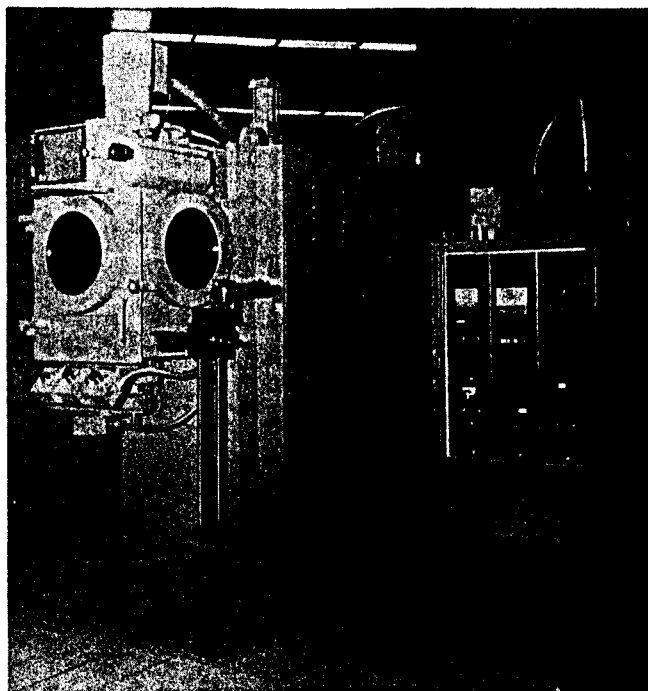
A General Purpose Medium Vacuum Electron Beam Welding Machine
